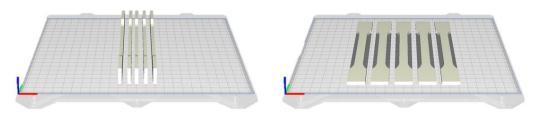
Layout of the tensile specimen edge (left) tensile specimen flat (right) and in the Cura Slicer.
